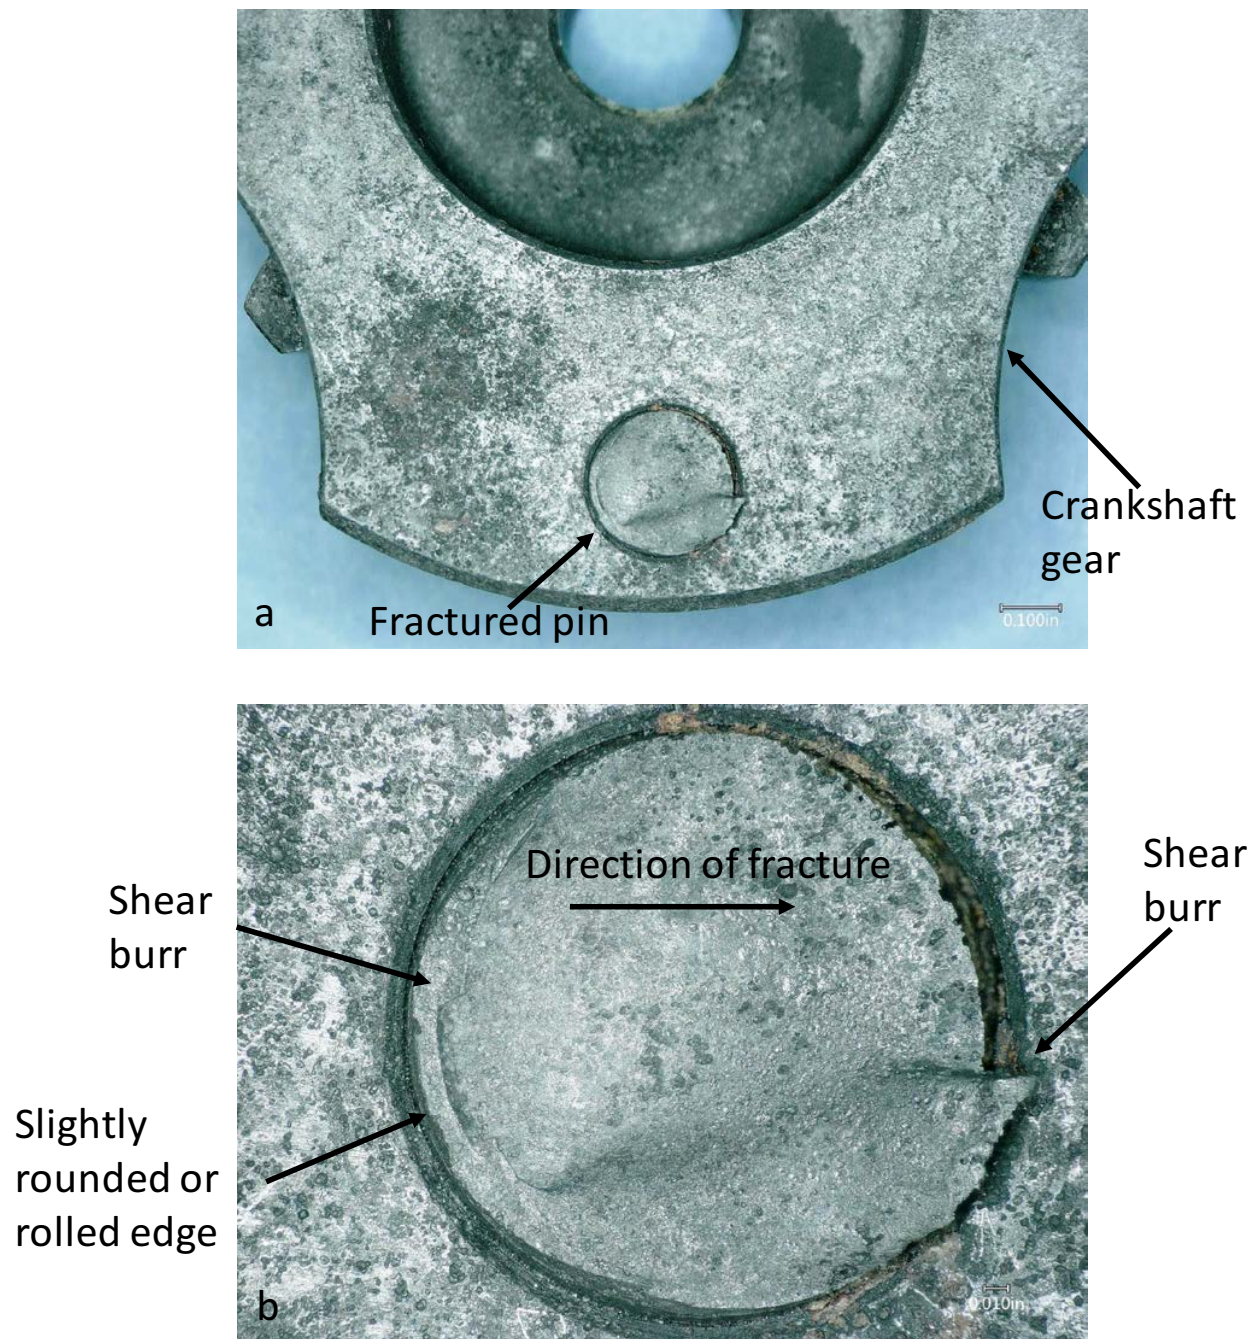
Close digital-microscope top-down images of the fracture surface of the dowel pin. The surfaces have been cleaned with Evaporust. Key fracture features are identified.
